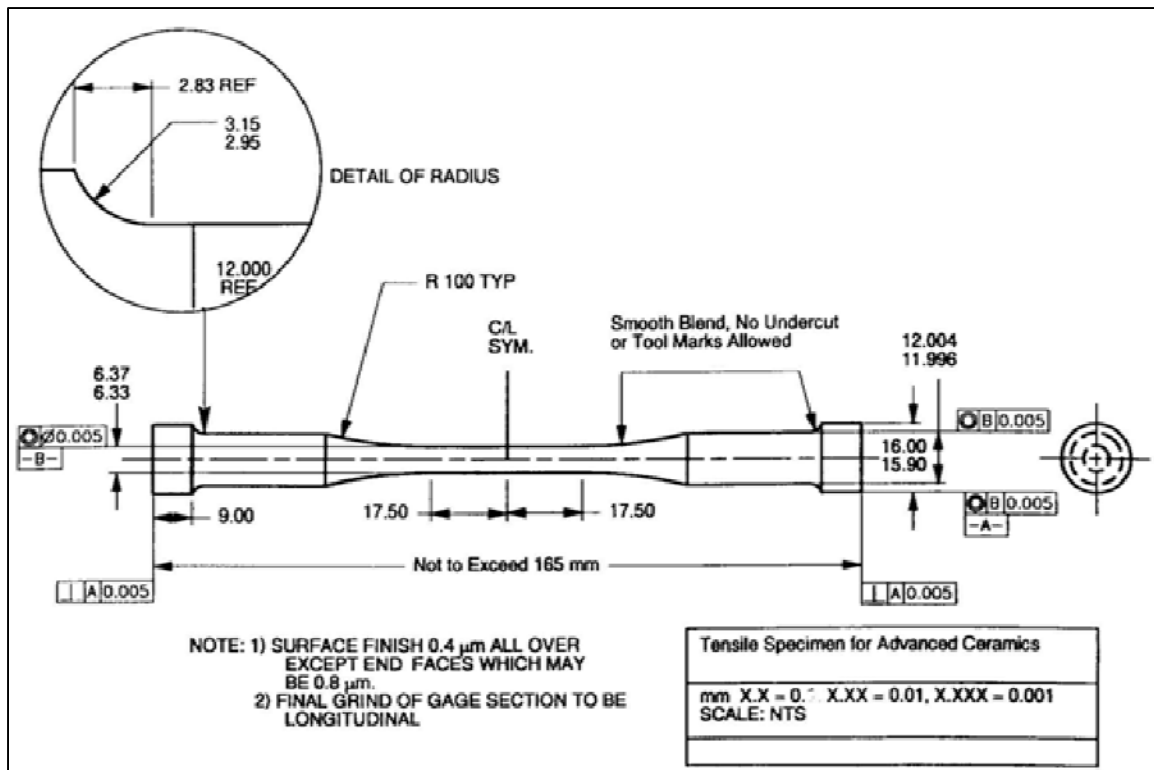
Drawing for 160-mm ceramic-tensile specimen, taken from figure 9 of ASTM C1273.
